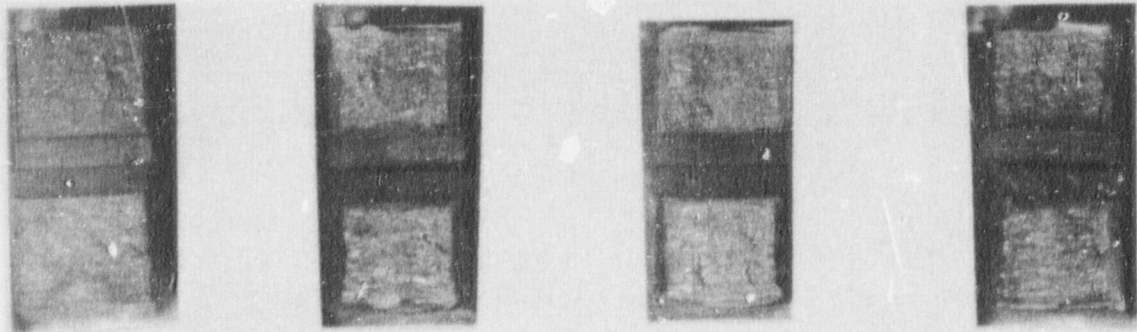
Charpy Impact Specimen Fracture Surfaces for Kewaunee Reactor Vessel Shell Forging 123X167 VA1 (Tangential Orientation)
